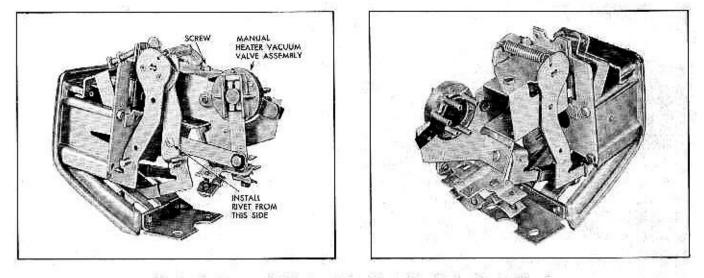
Vacuum Switch Mounted to Direct-Aire Heater Control Panel
